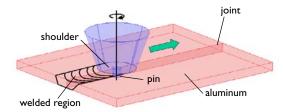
Two aluminum plates being joined by friction stir welding.
